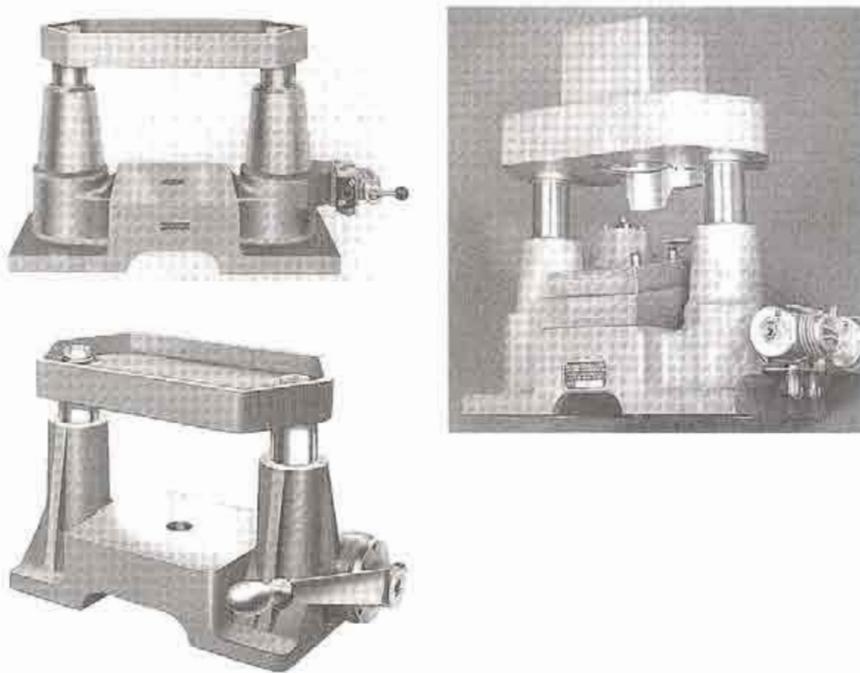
Two types of universal jigs are manual (bottom) and power-actuated (center). A completed jig (on the top) made from unit right below. (*Courtesy of Cleveland Universal Jig Division, The Industrial Machine Company.*)
